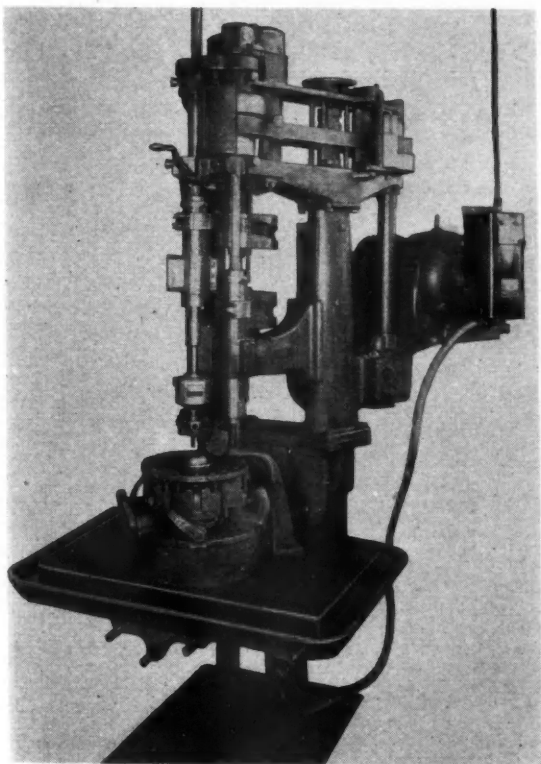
(above)—Circular indexing fixture for drilling and tapping
